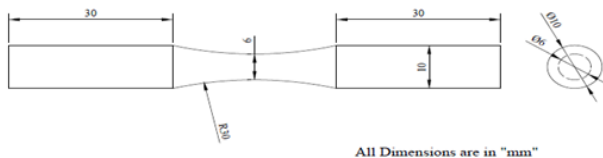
Fatigue test specimen as per ASTM E466 standard
